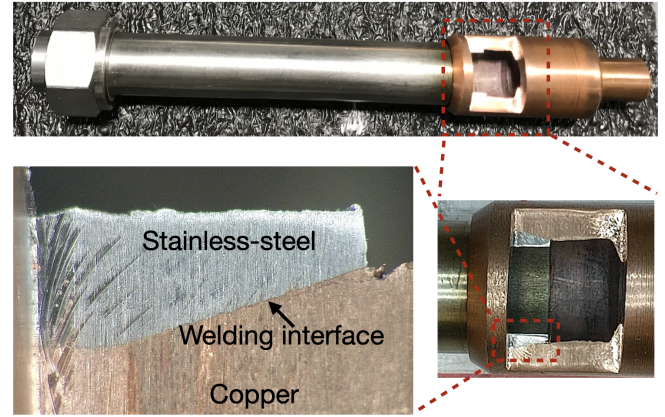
Stainless-steel-to-copper bimetallic joint fabricated by friction welding.
